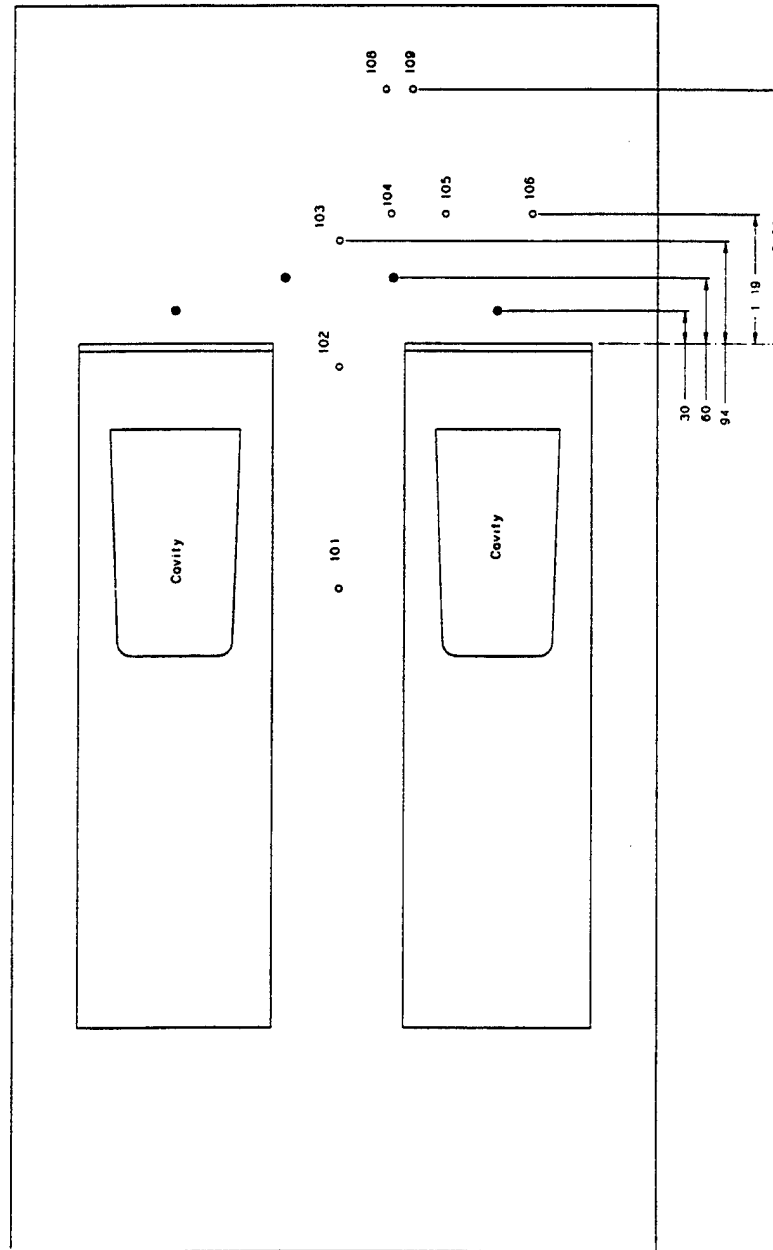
Coaxial Thermocouple Locations on the Pilot Mounting Frame
